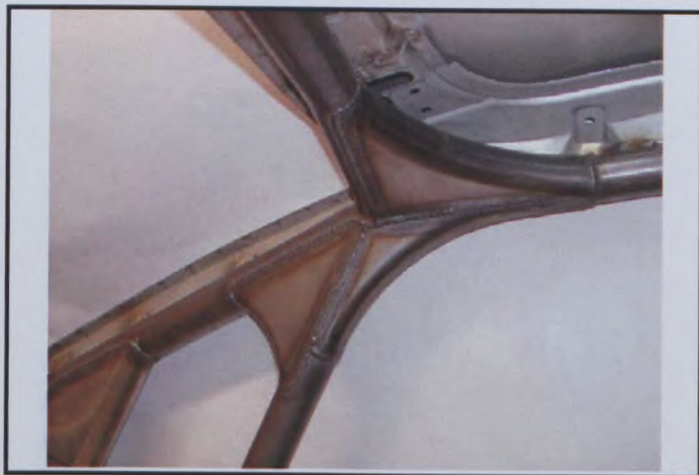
front roll bar with longitudinal member to roof reinforcement diagonal member (left side)
